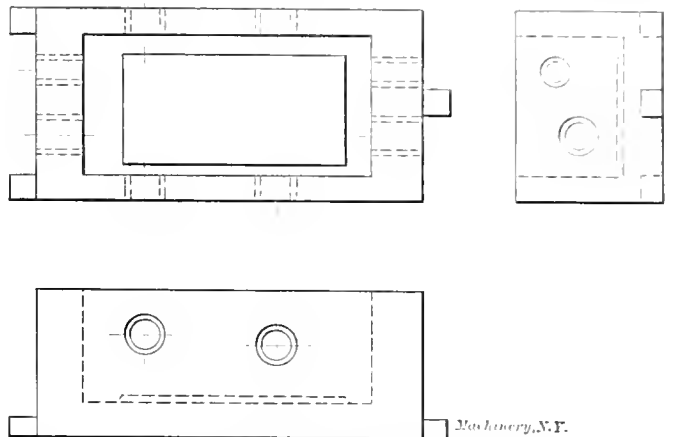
Jig for Boring Holes through Work both from Sides and Ends.
